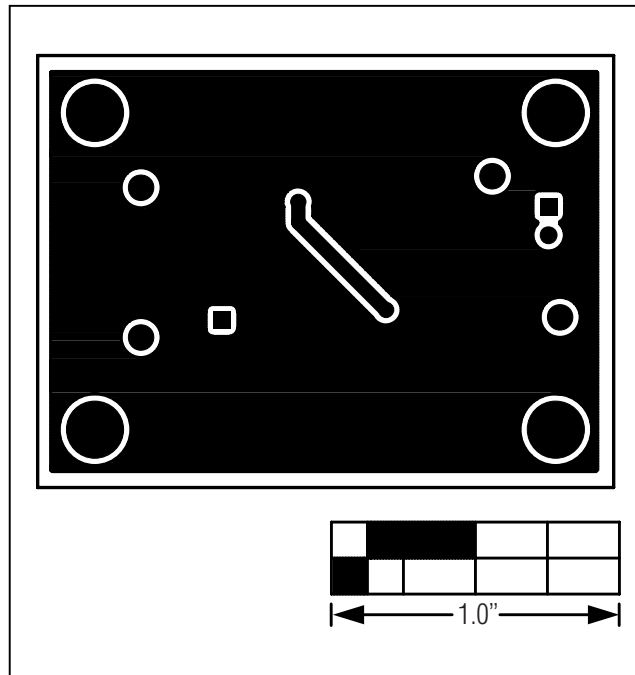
MAX9613 EV Kit PCB Layout—Solder Side
